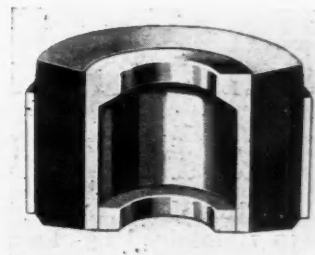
The mounting is formed of a rubber bushing vulcanized to a central sleeve and an outer shell
